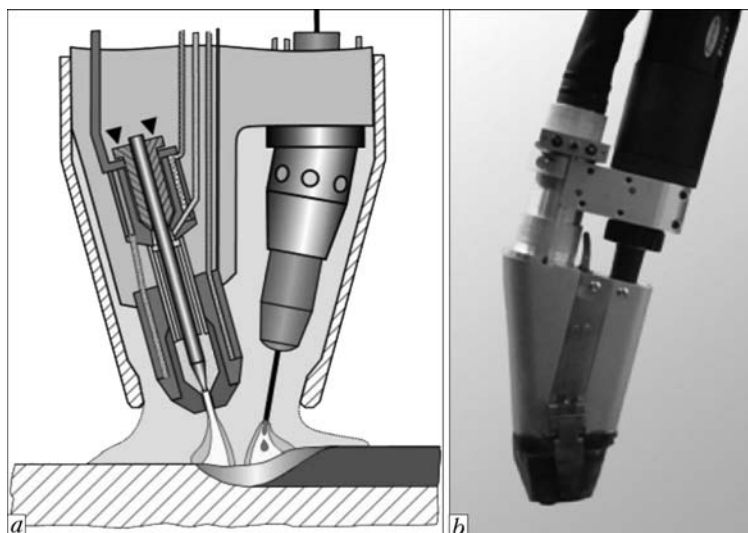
Schematic (a) and welding torch for Super-MIG process (b) [41]
